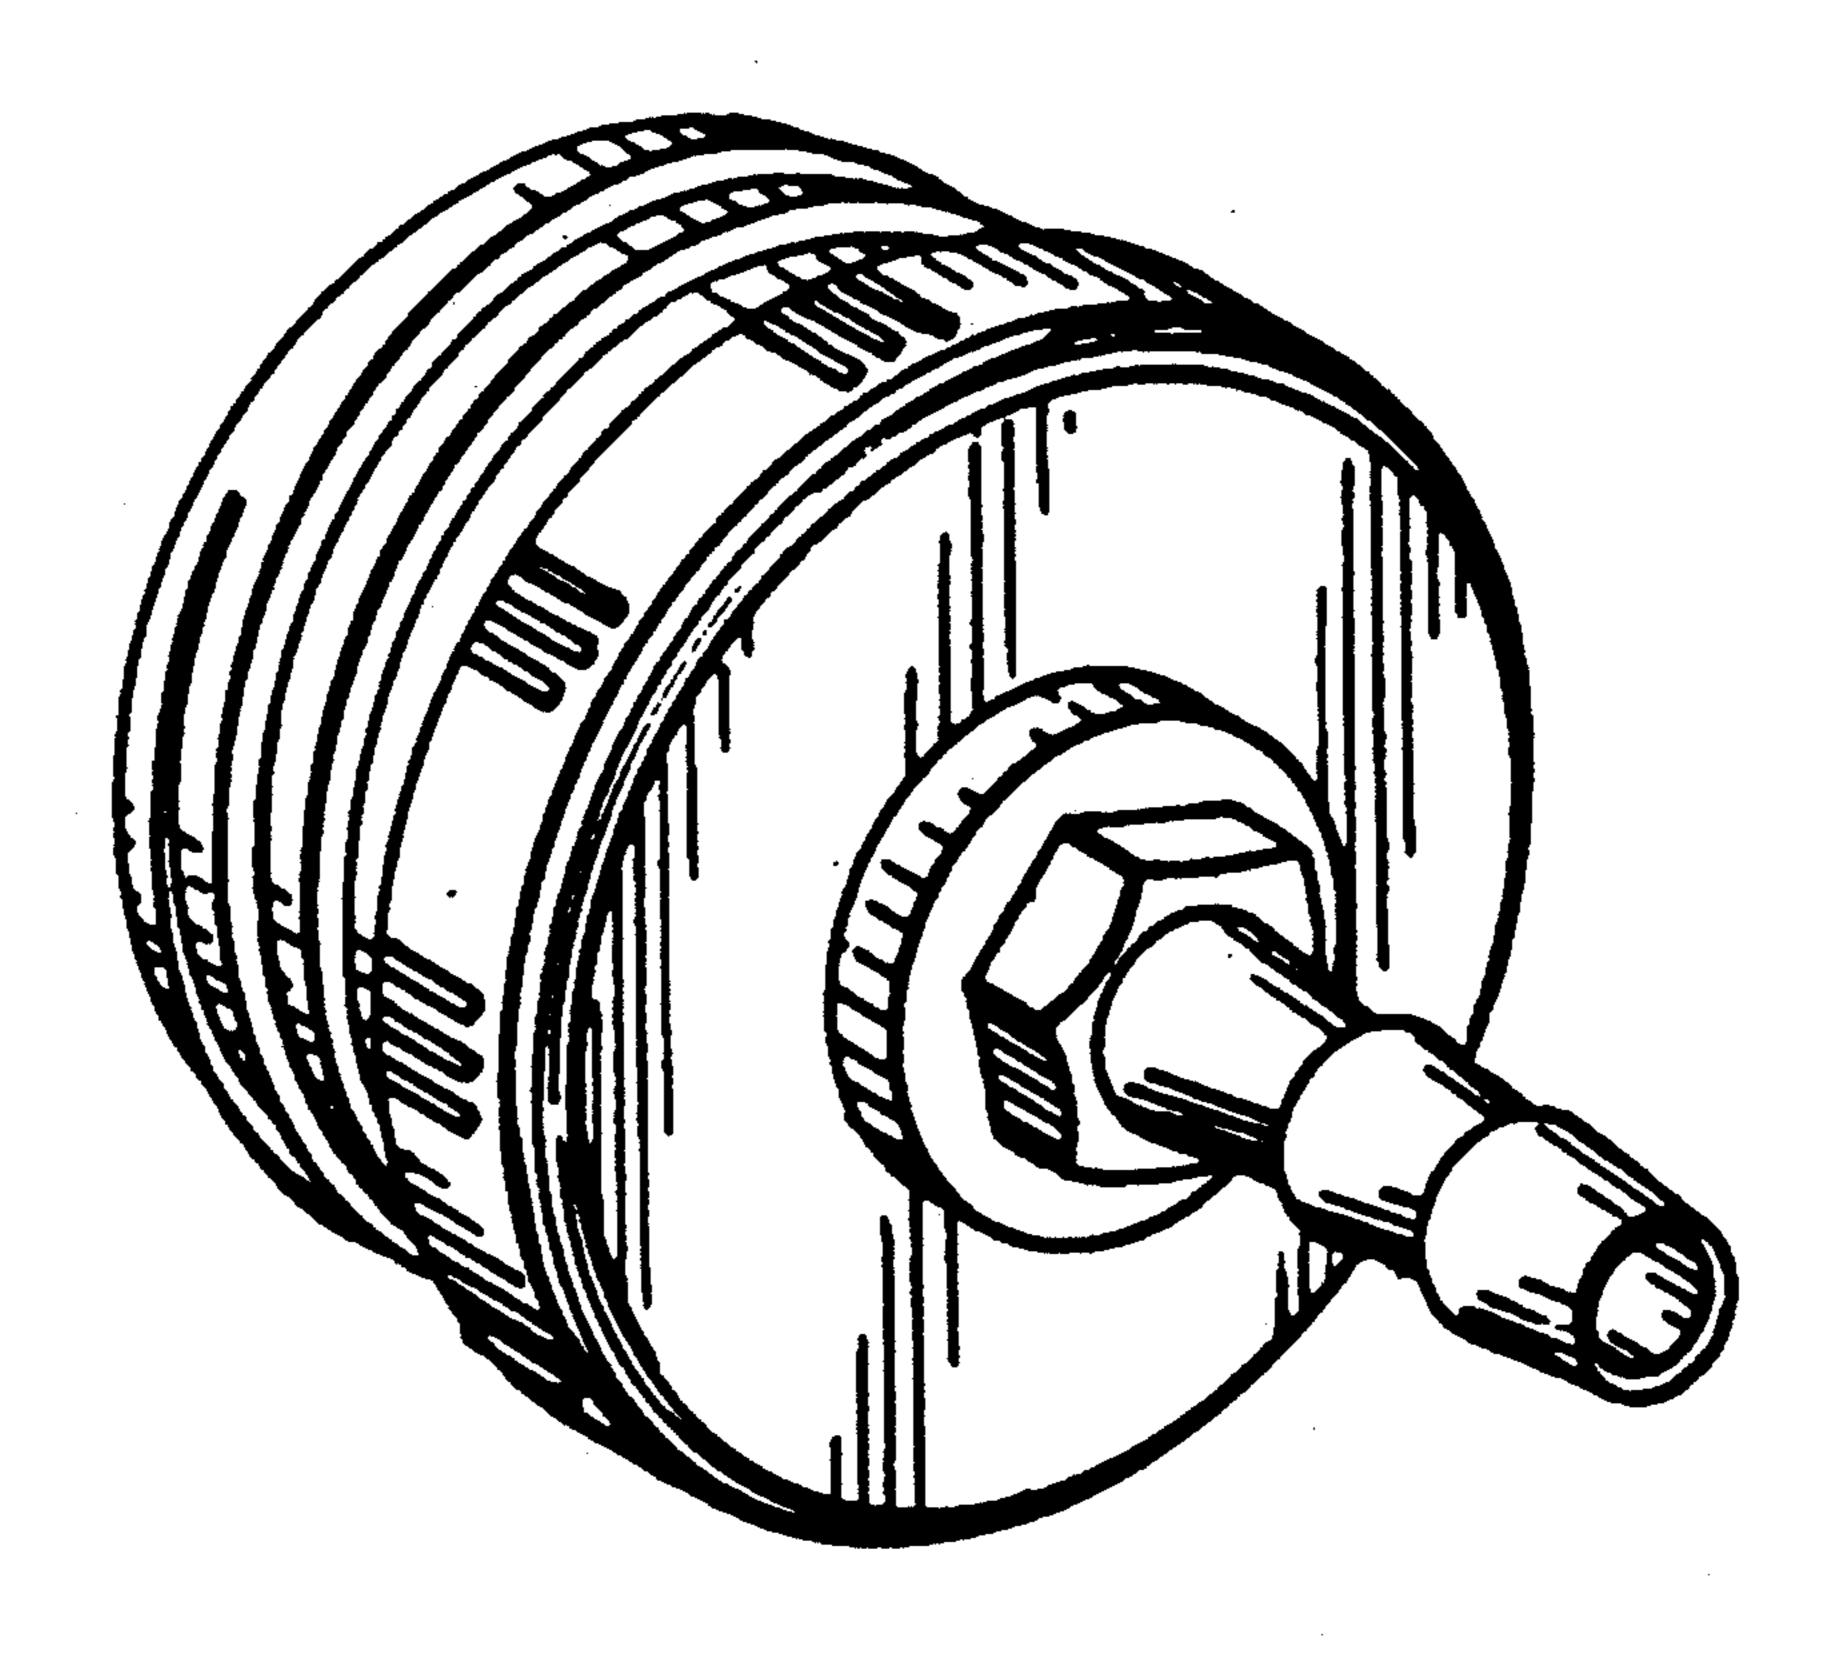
is a front perspective view of a second embodiment of a test probe for a facepiece respirator showing my new design;
